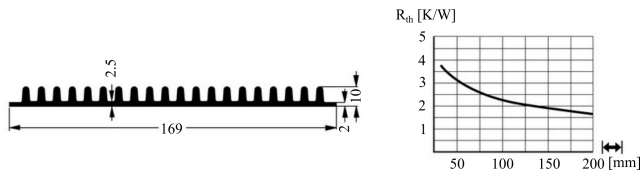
Standard extruded heat sink is used as inspiration for inverter enclosure design [68].
